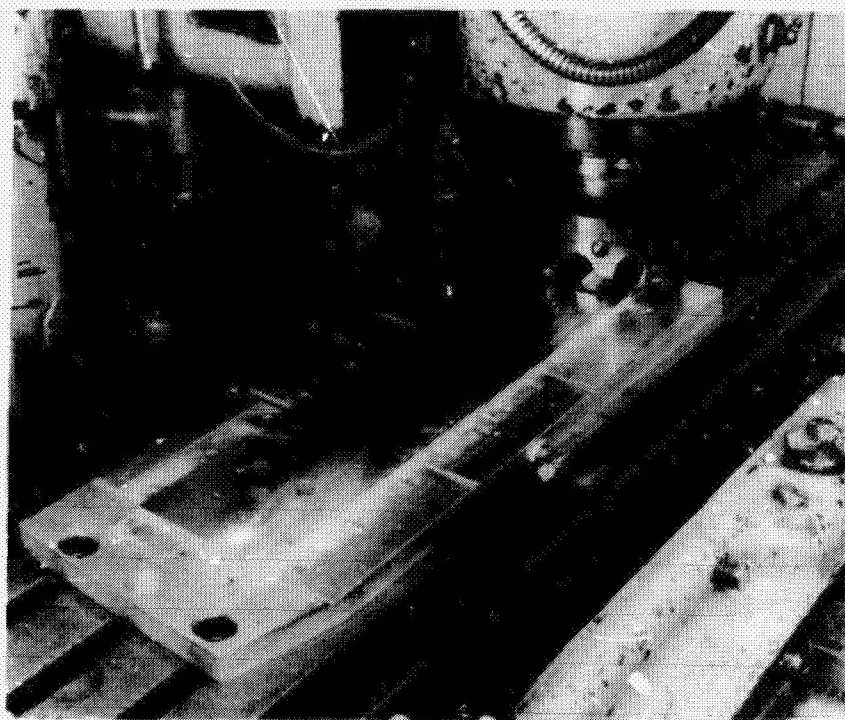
Closeup View of the Face Milling Operation Performed on the Test Specimen Surface
